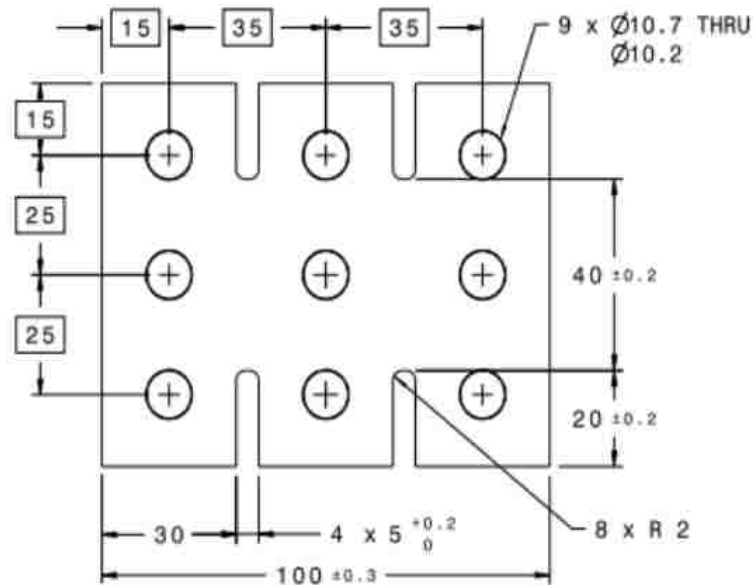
Shear test specimen used by Sarker [14] (dimensions in mm)
